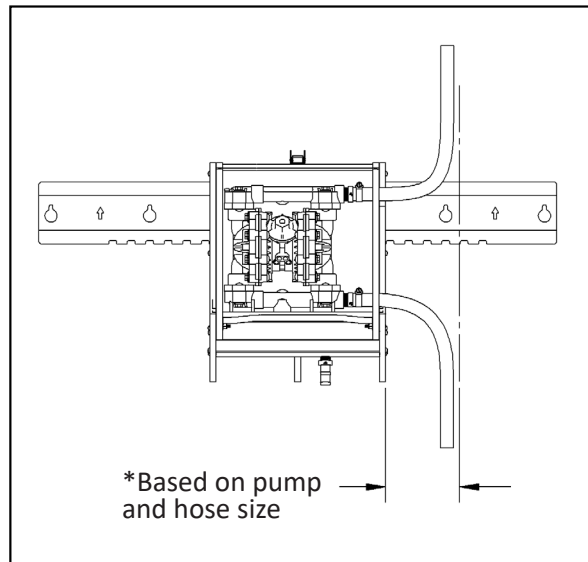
Mounting clearance for rail mounted Pump Box. Shown with Graco Husky 515 pump.
